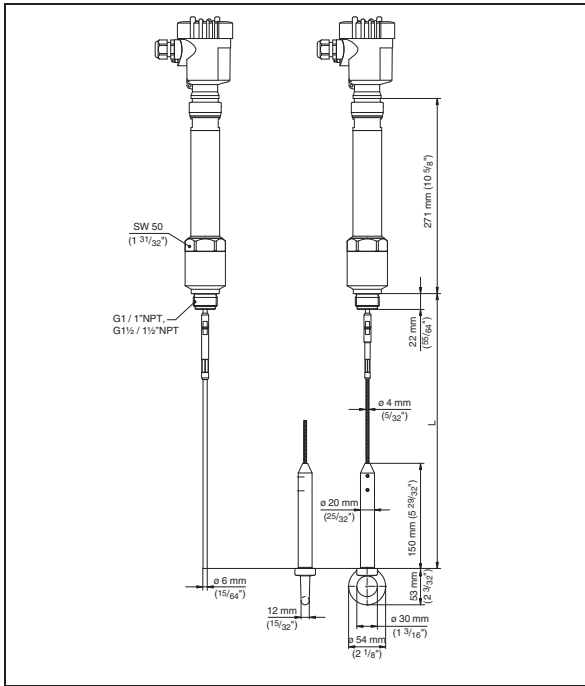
VEGAFLEX 67 - cable, rod version with thread (-110 ... +400 °C/-166 ... +752 °F)
